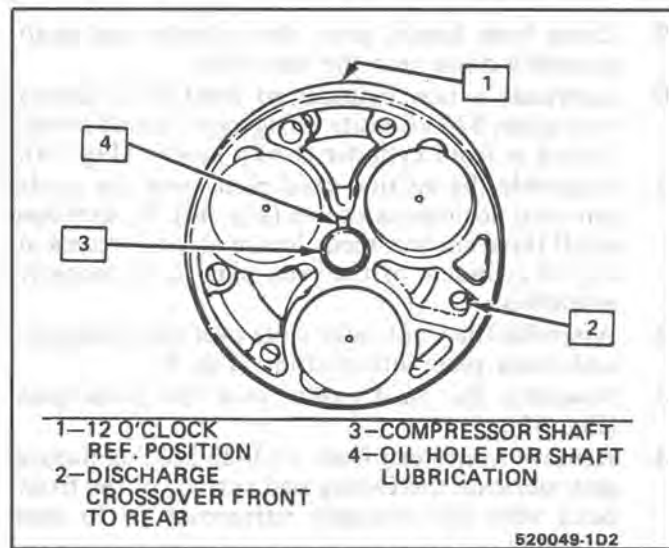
Rear View and Detail of DA-6 Cylinder and Shaft Assembly
